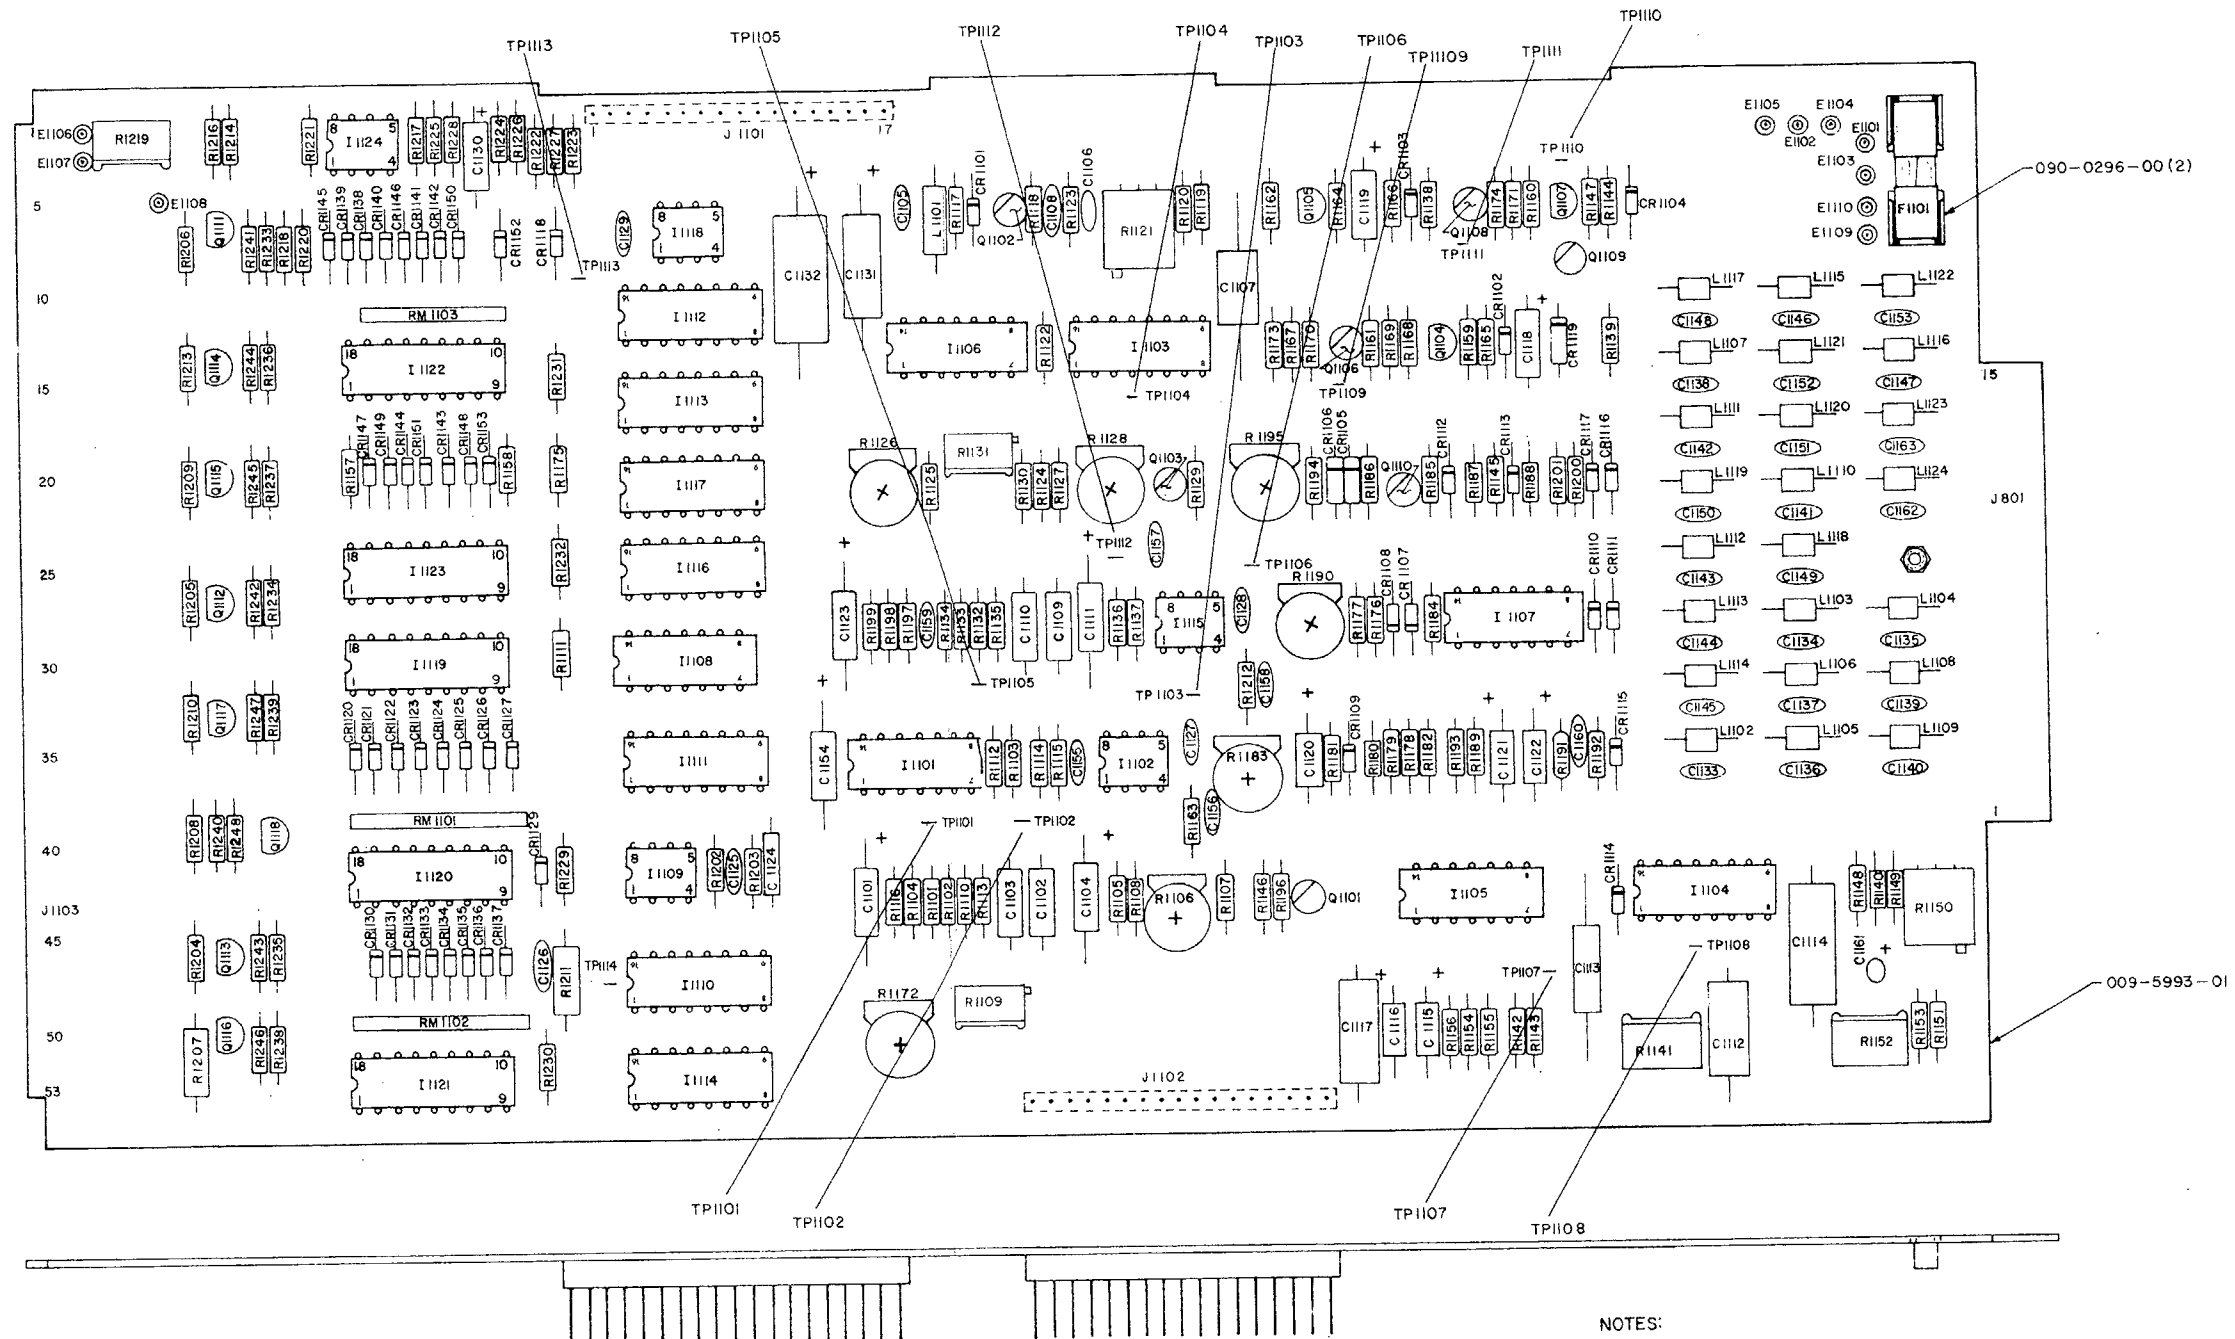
CONVERTER/DISPLAY BOARD ASSEMBLY
